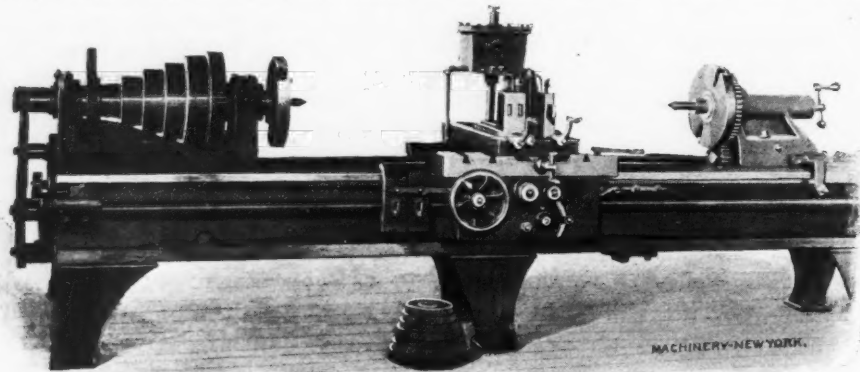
SPRINGFIELD SHAFTING LATHE.
